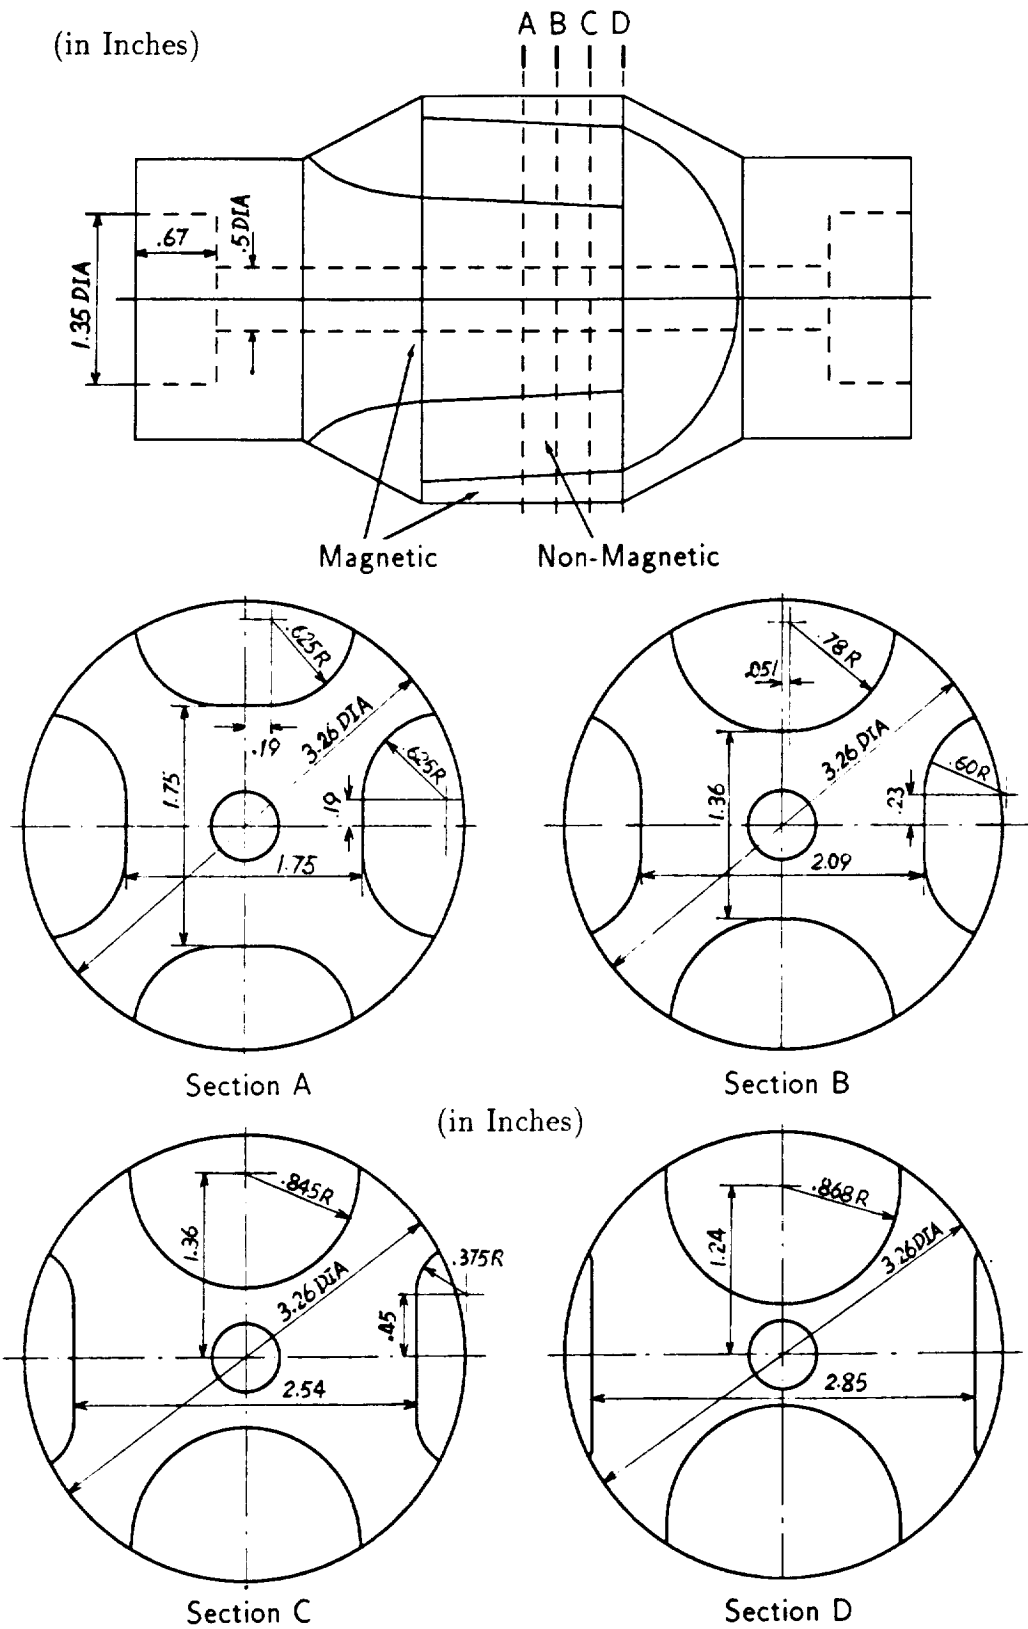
Dimensions of the Bimetallic Rotor
